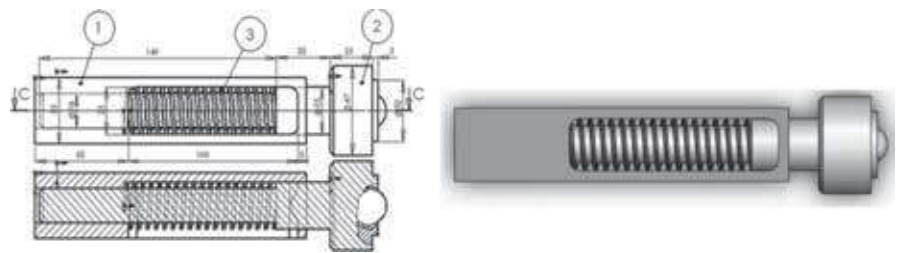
Drawing of ball burnishing tool, casing (1), adapter cover (2), spring (3) [13]
